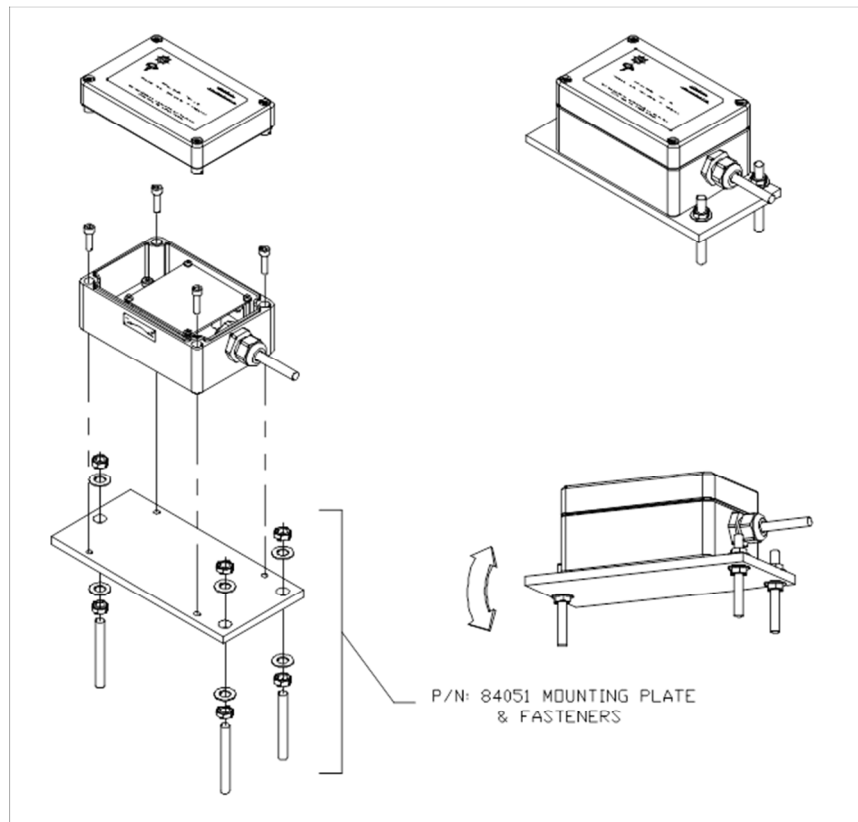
Model MD900-T Digital Clinometer Layout (Exploded View)
